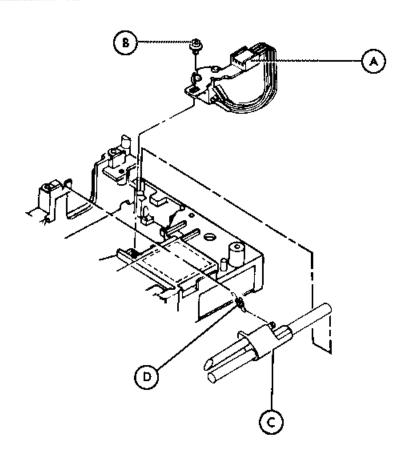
TRACK 00 SENSOR REMOVAL/REPLACEMENT
